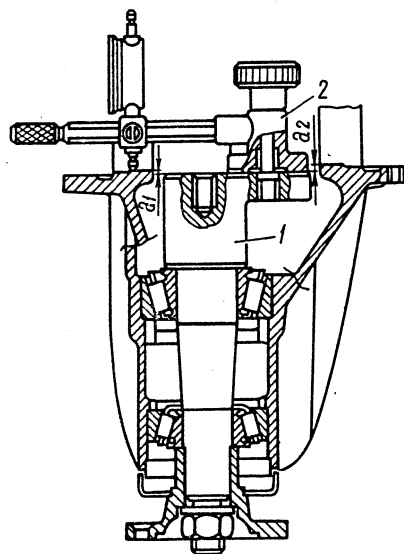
Measuring the Thickness of Drive Pinion Adjusting Ring:
